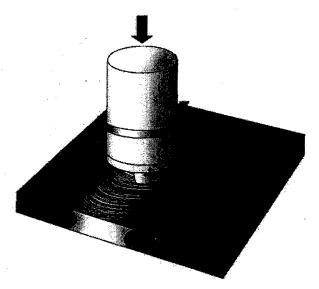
Schematic illustration of the friction stir welding process.
